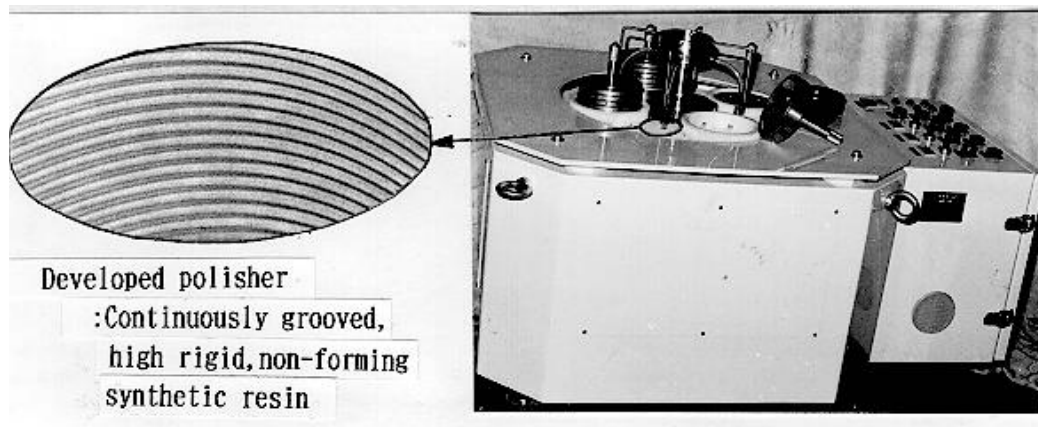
Photograph of a processing machine (prototype) and a newly developed polisher
